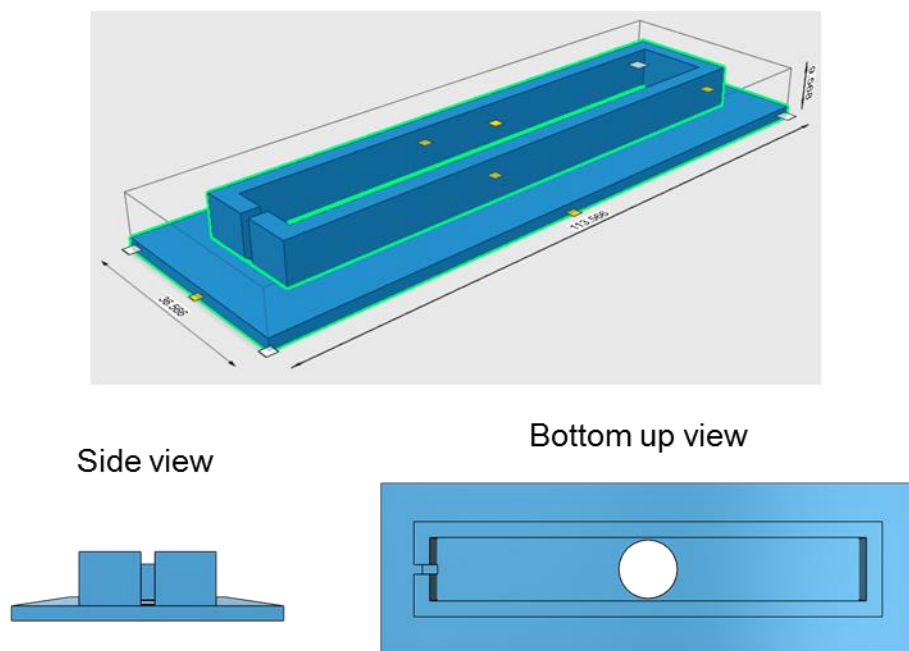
3D model used to print the graphite press cap used in the larger scale reactor. Dimensions are in mm.
